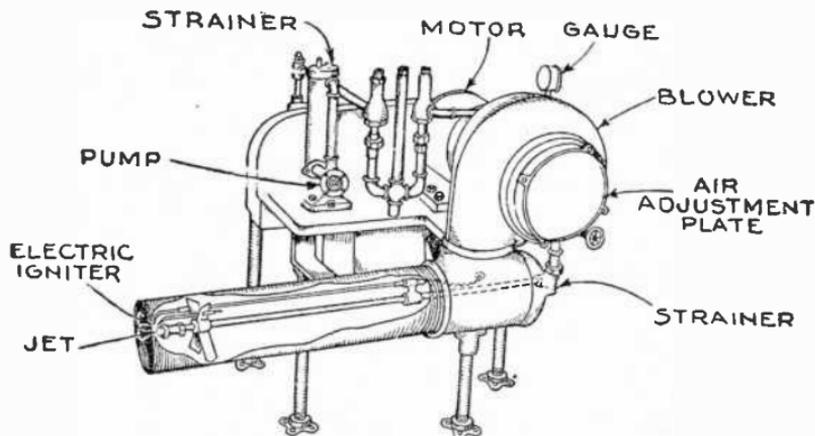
,707.—Motor driven atomizer burner of the electric ignition type.
